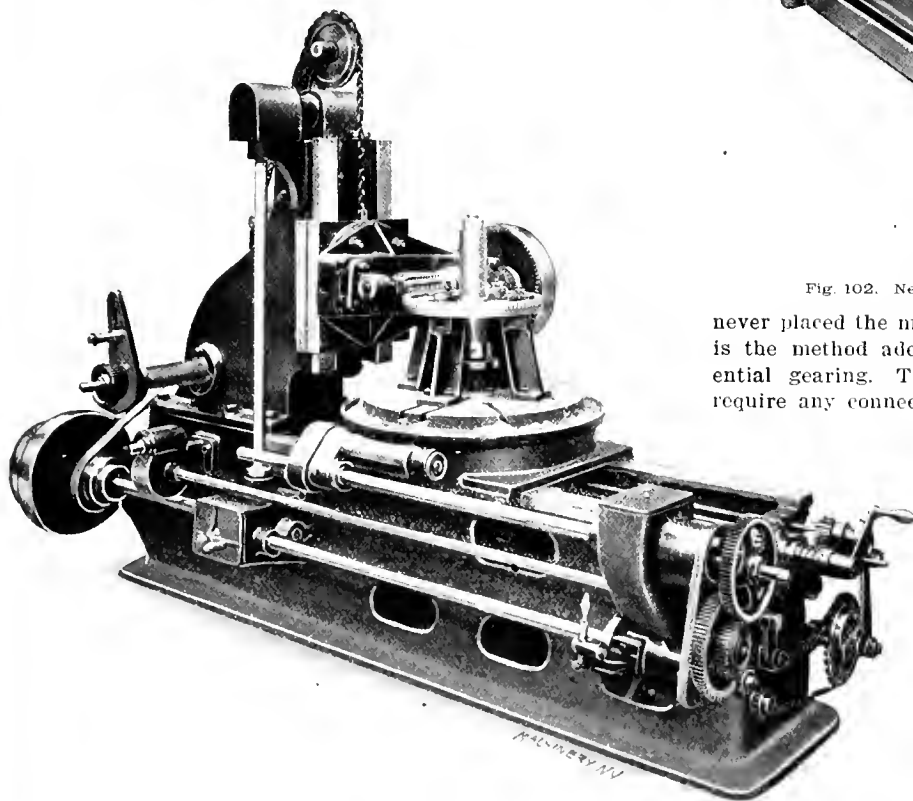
Holroyd Gear-hobbing Machine. Though shown cutting Spur Gears, it will cut Helical Gears as well
